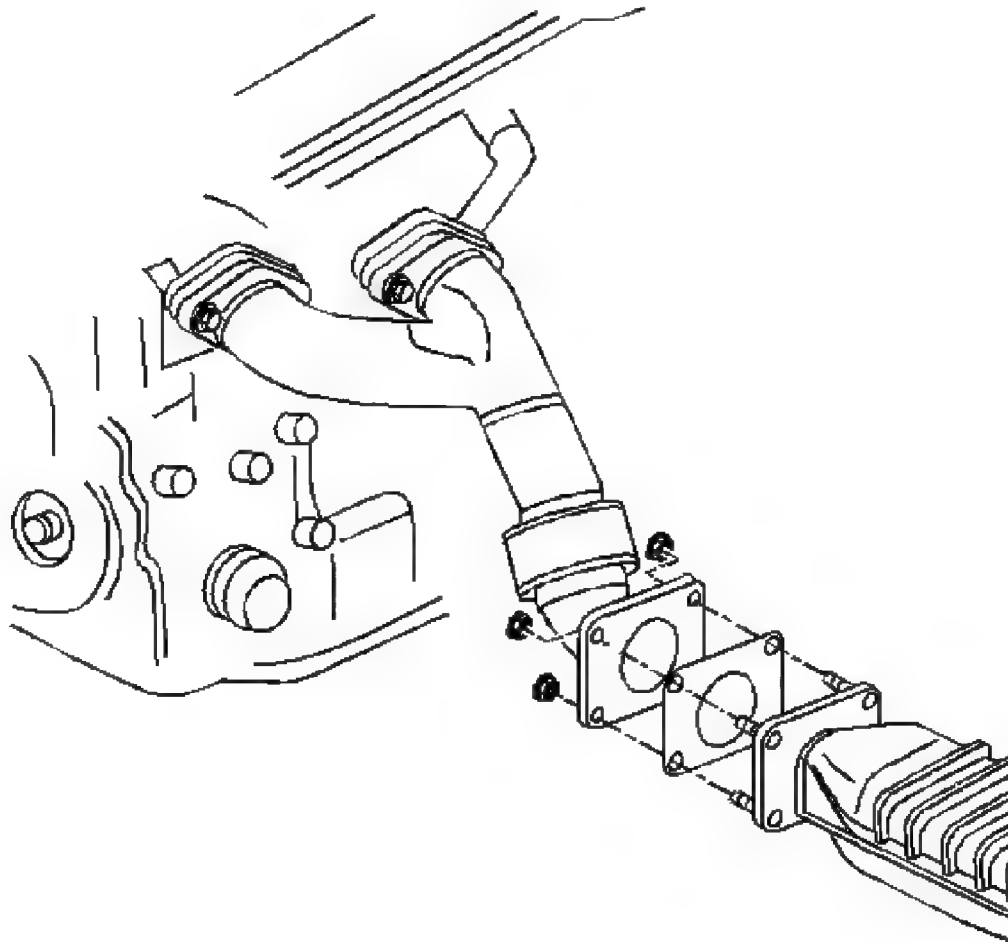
View Of Exhaust Pipe & Catalytic Converter
